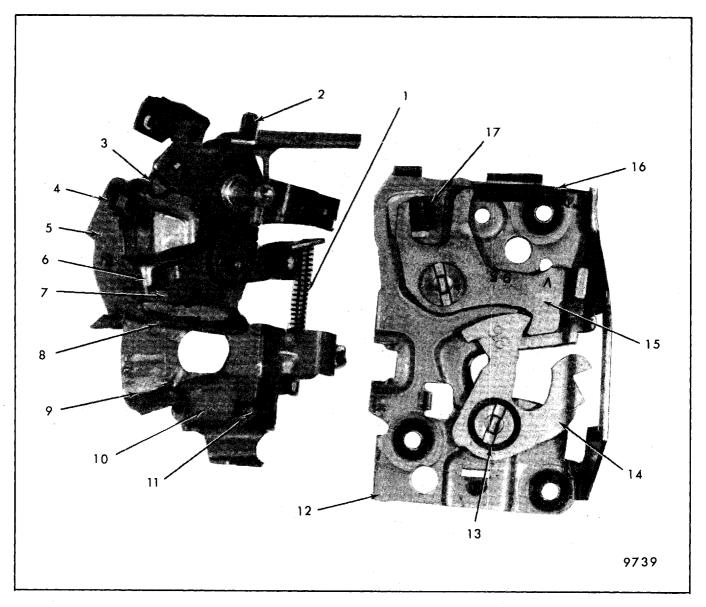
Typical A Style Door Lock - Separated for Illustrative Purposes (A Sedan Front Door Lock Shown; Other A Style Front and Rear Door Locks Similar)
